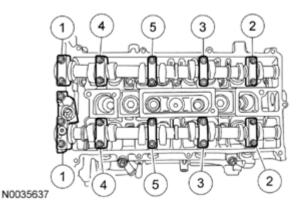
Identifying Camshaft Bearing Cap Bolts Loosening Sequence Courtesy of FORD MOTOR CO.
